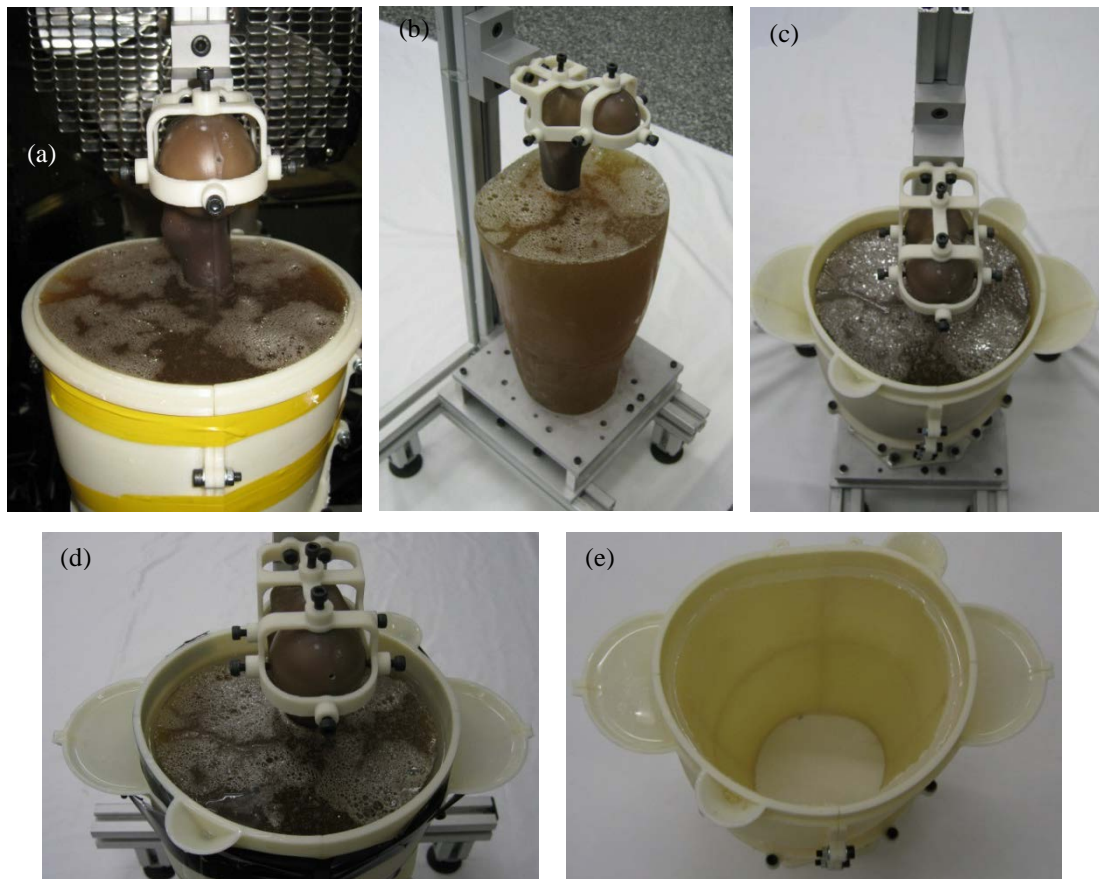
Images showing the stage 1 and 2 development stages for the surrogate skin layer: (a) gelatin being cooled in skin inner mould; (b) cured gelatin removed from mould; (c) gelatin positioned in skin outer mould assembly; (d) PDMS skin simulant poured into gap between the gelatin and mould cavity through funnels; (e) gelatin removed from the mould and PDMS skin layer cleaned from contaminants.
